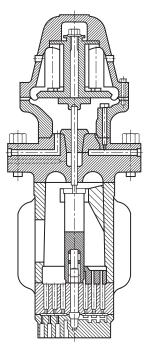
Sectional view of a depressor type valve unloader. Courtesy of Cooper Industries Energy Services Group.
